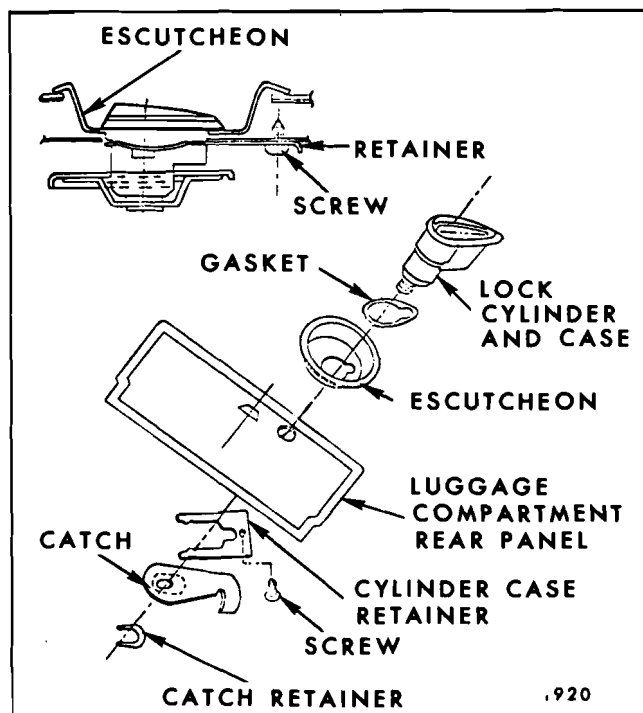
Luggage Compartment Lock - Chevrolet "B" Styles
